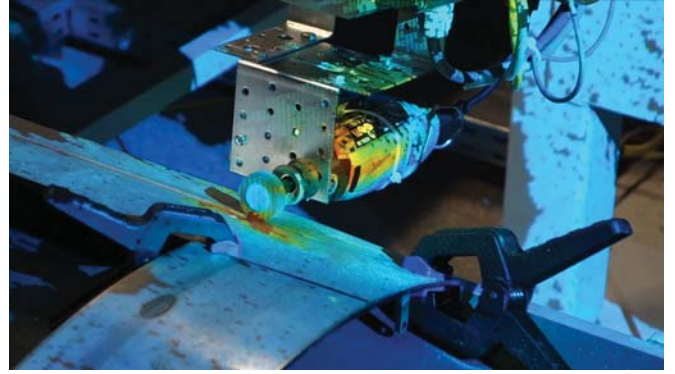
Display of temperatures during processing: the heat developing on the surface due to the grinding, as well as in the motor of the tool becomes clearly visible.
